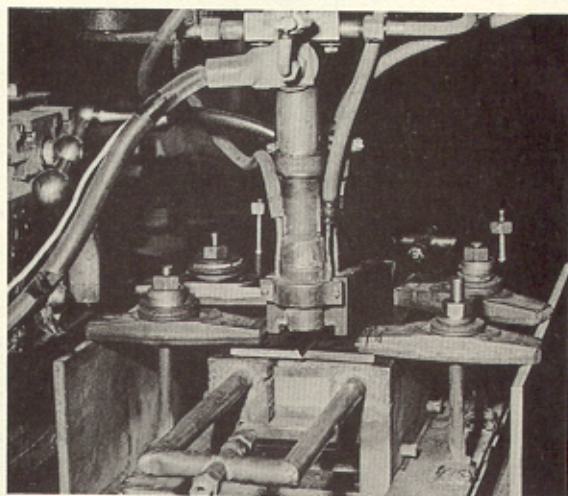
AUTOMATIC INERT-GAS-SHIELDED CONSUMABLE-ELECTRODE WELDING EQUIPMENT used for preparing weldments in 1/4-inch plate.
